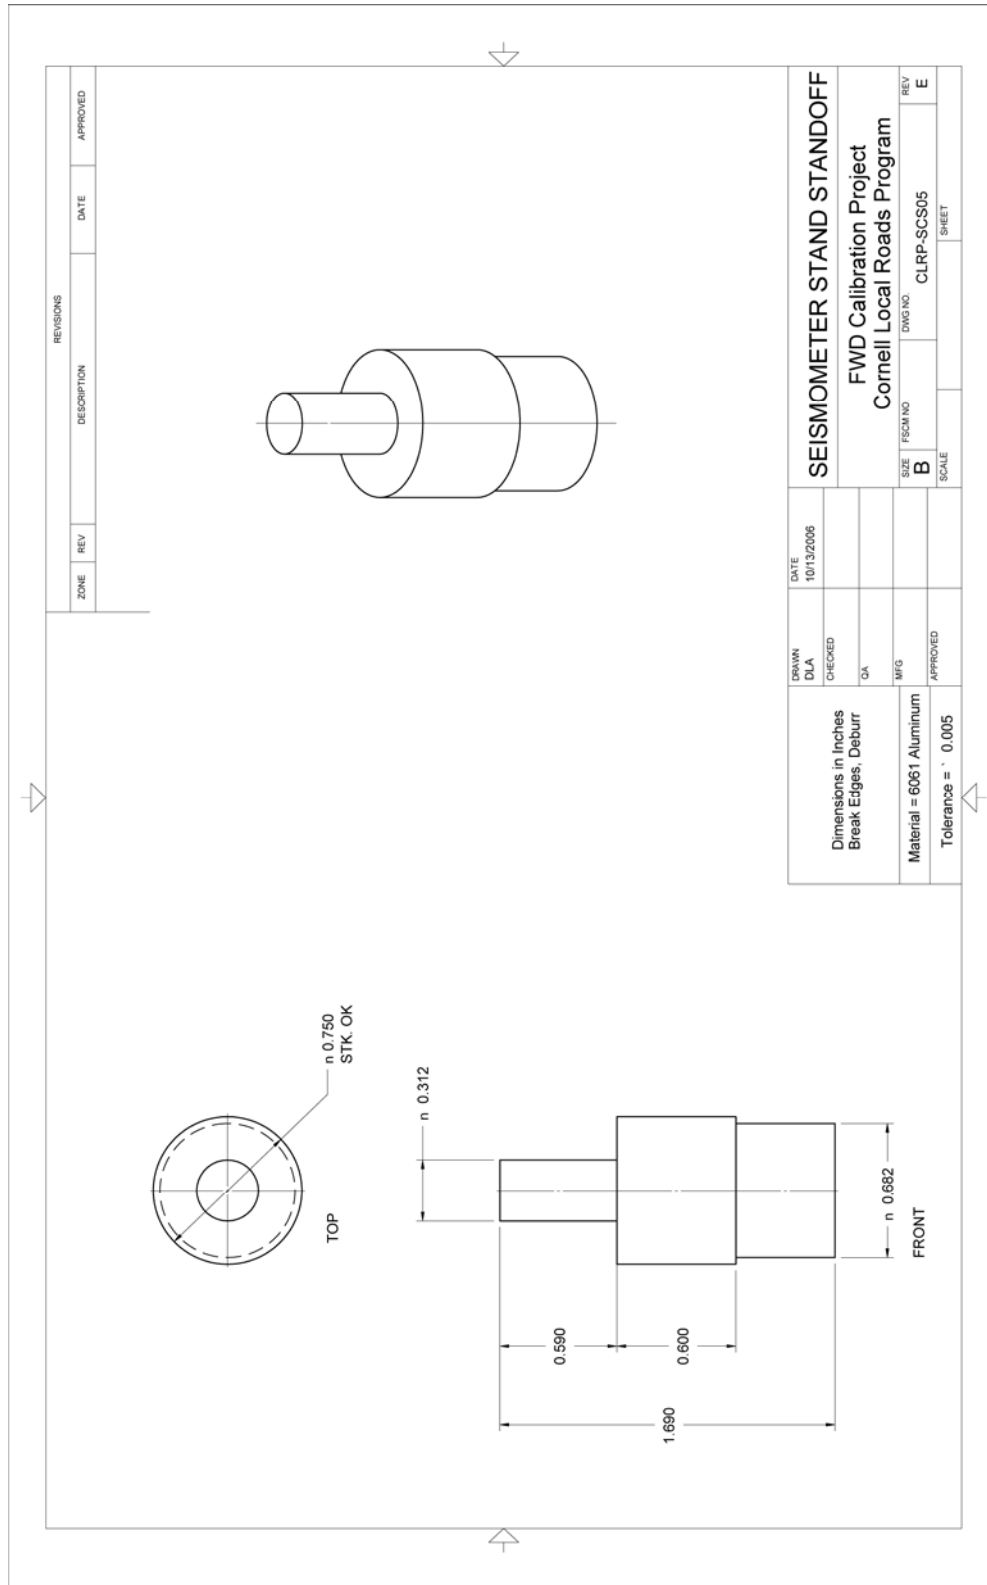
Drawing. CLRP-SCS05 Seismometer Stand Standoff.
